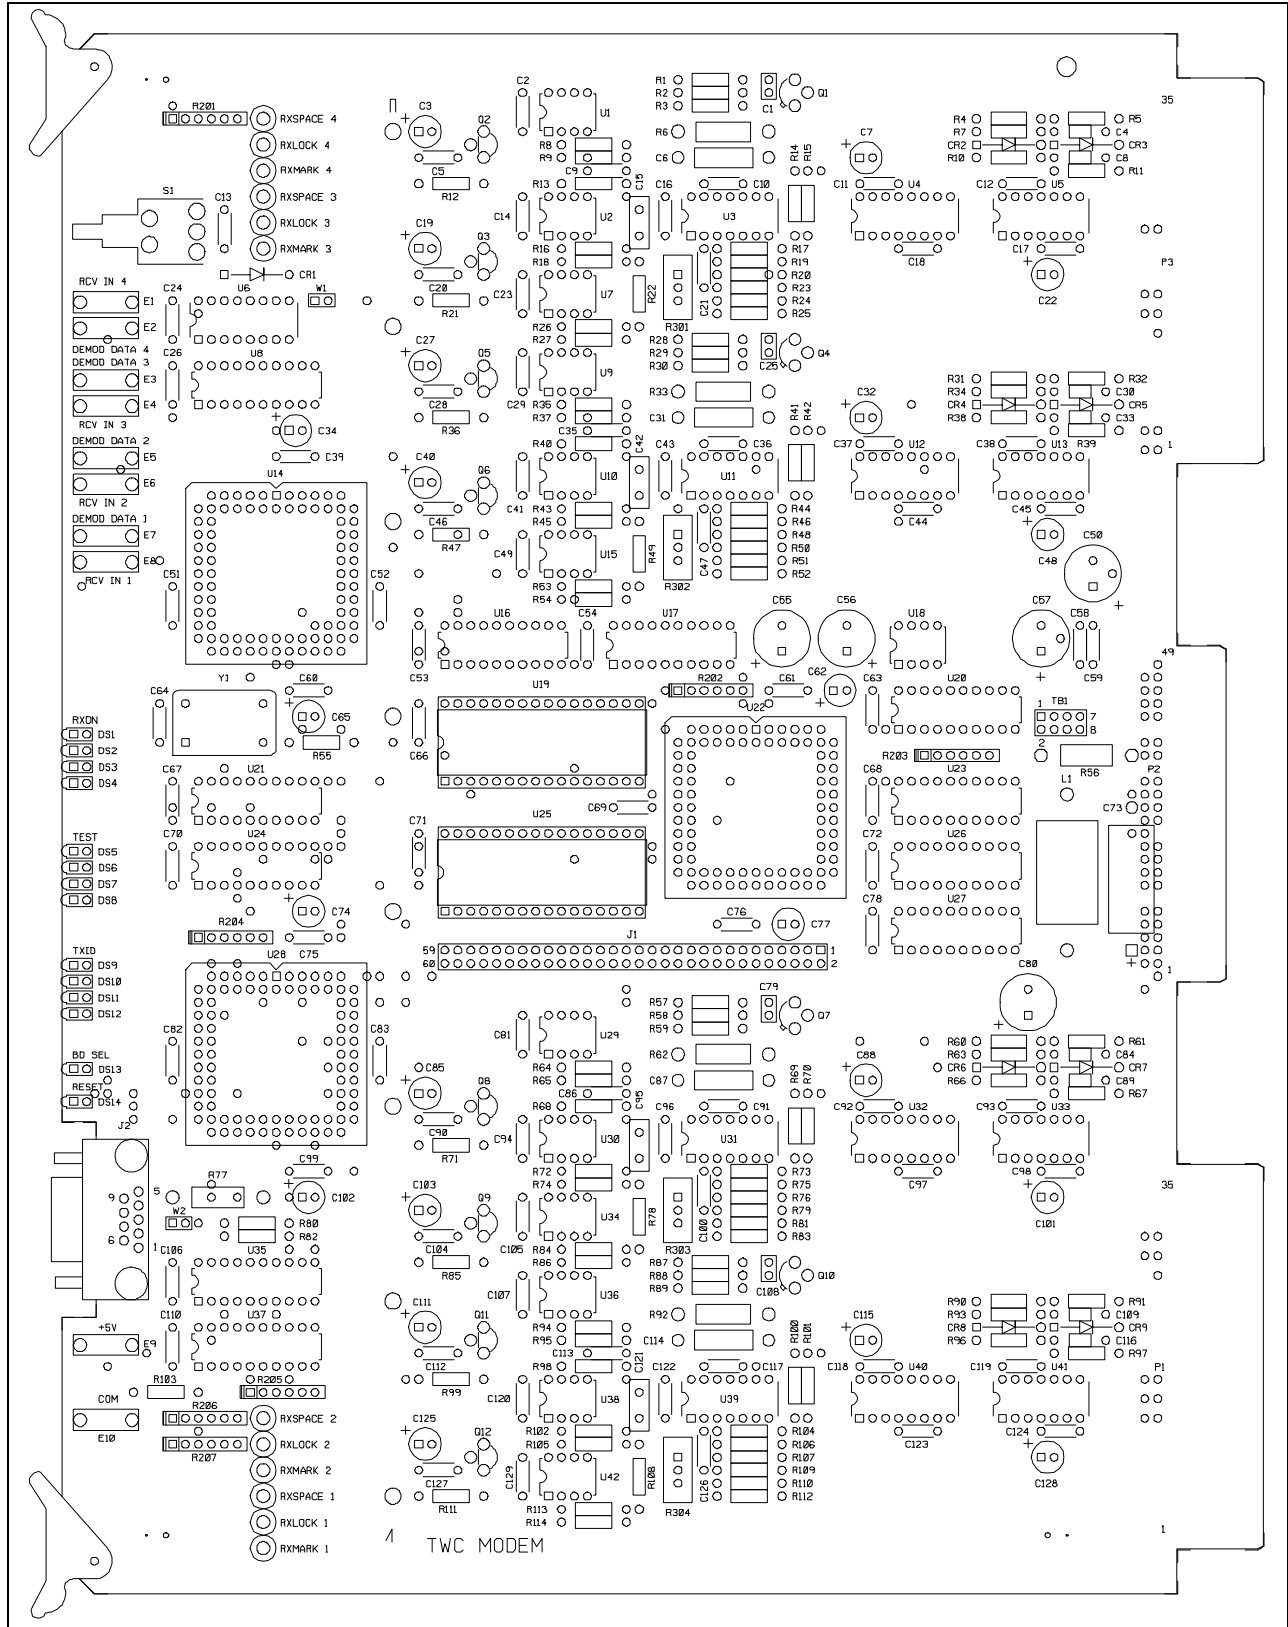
NVTWC-FSK Board, P/N 31166-119-00
